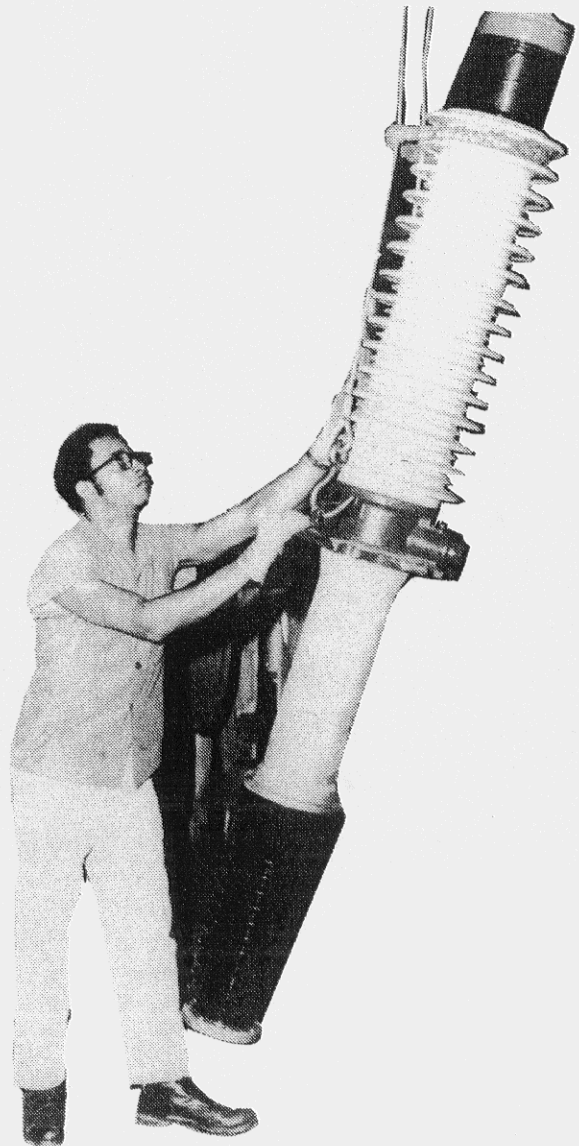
Slings Arrangement for Installation of Bushing in Breaker
